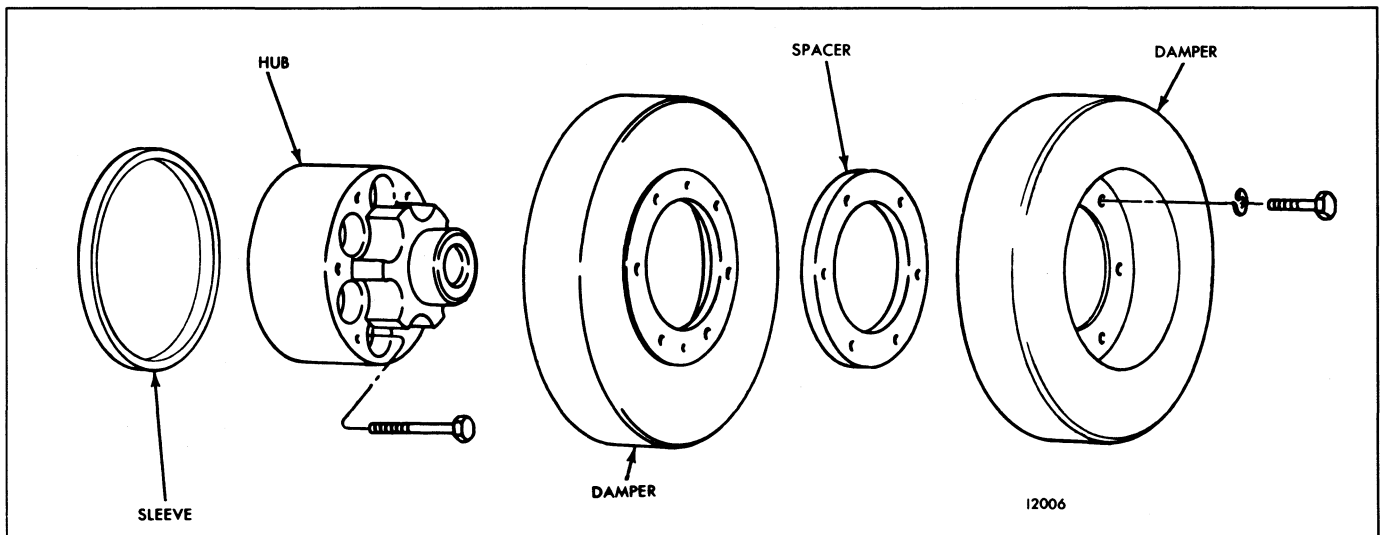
Vibration Damper, Hub and Sleeve Assembly Details and Relative Location of Parts (12V Engine)
